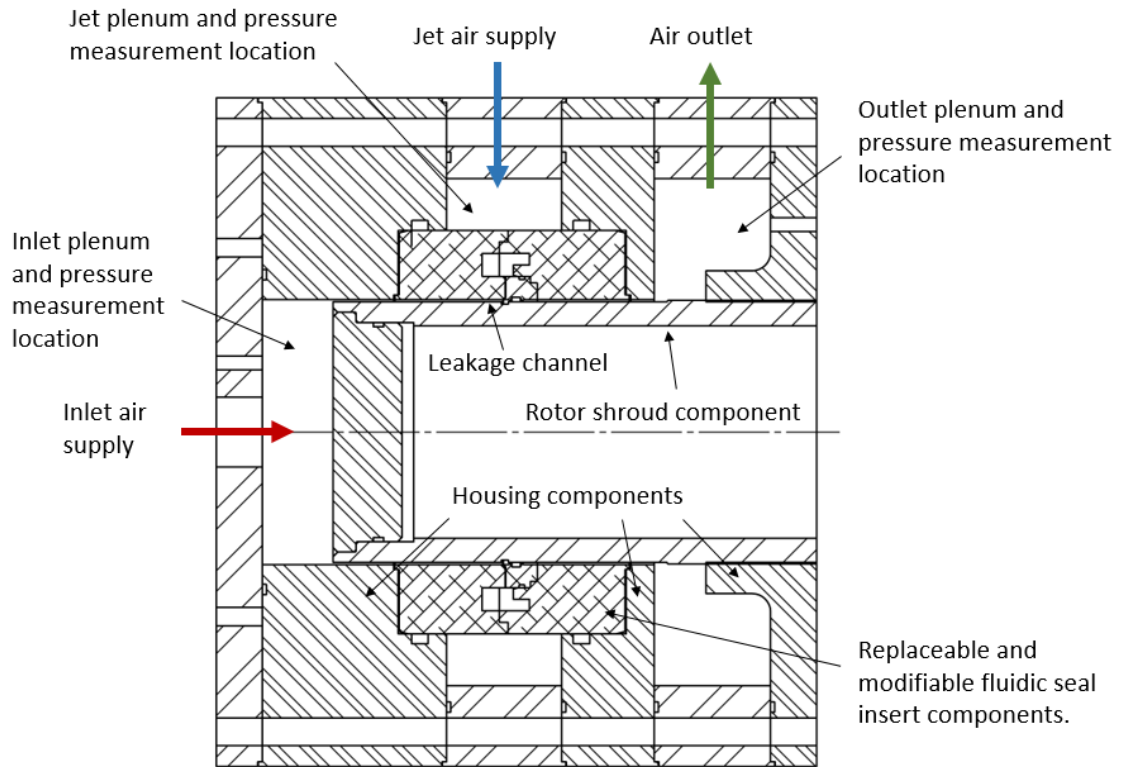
Cross View of the Stationary Rig Design, Including Fluidic Seal Insert
